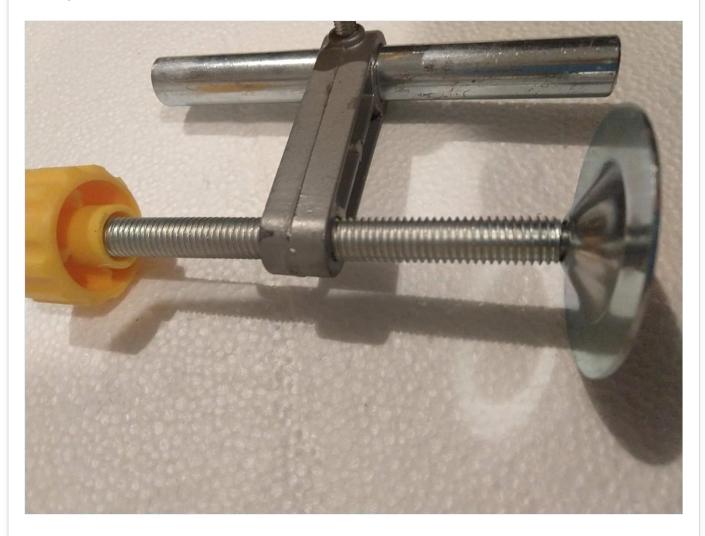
Assembled Wood Stock Clamp Screw Holder. This image shows the complete clamp assembly, including the main body, threaded screw, clamping disc, and adjustment knobs.
